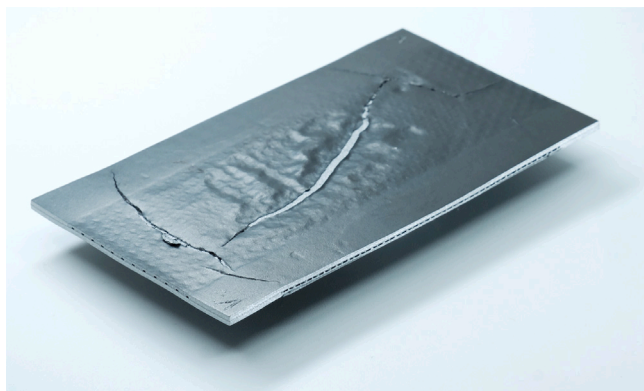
Picture of a SOFC distorted and fractured after the debinding process, cf. [8].
